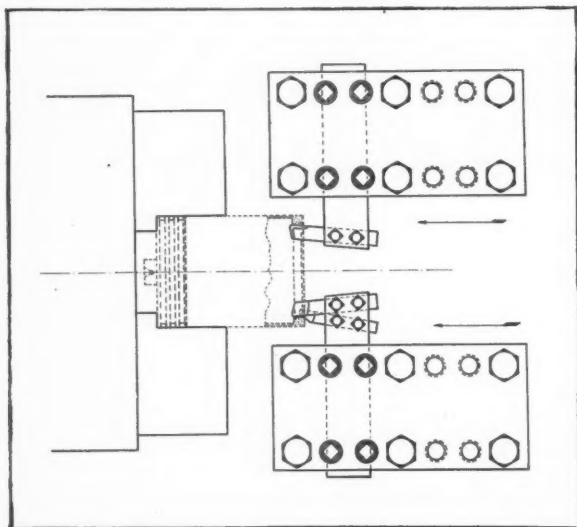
Rough- and finish-boring and chamfering the Skirt of the Piston
